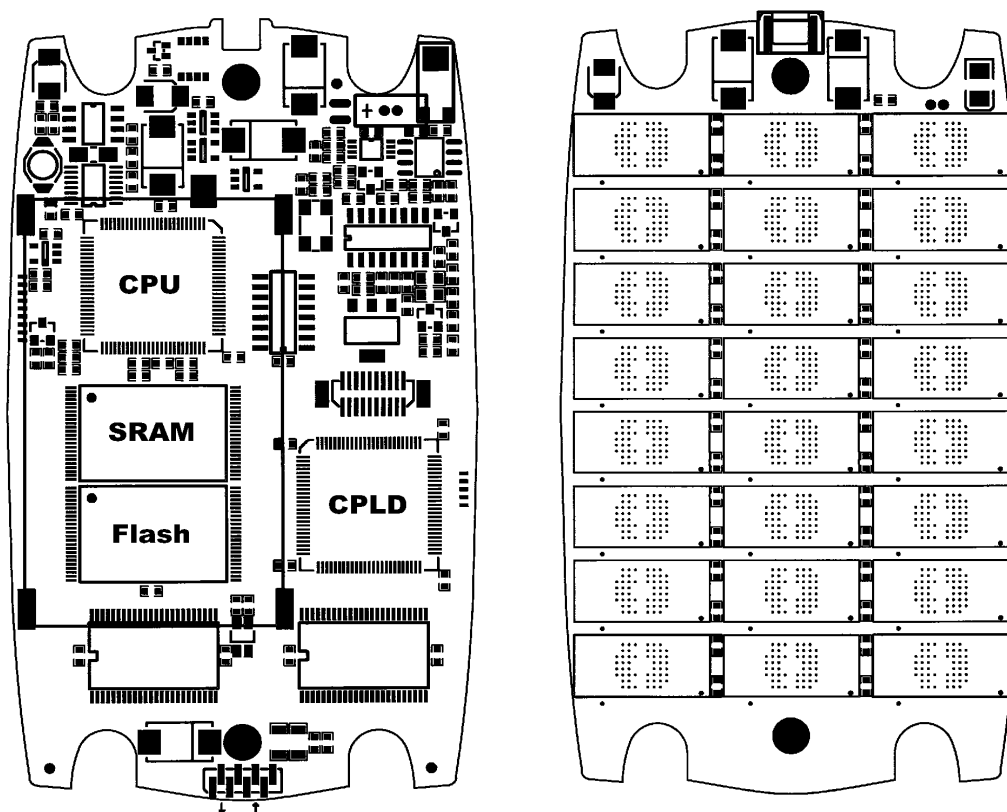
Drawing of NetDrive motherboard. Top view (right) and bottom view (left).
